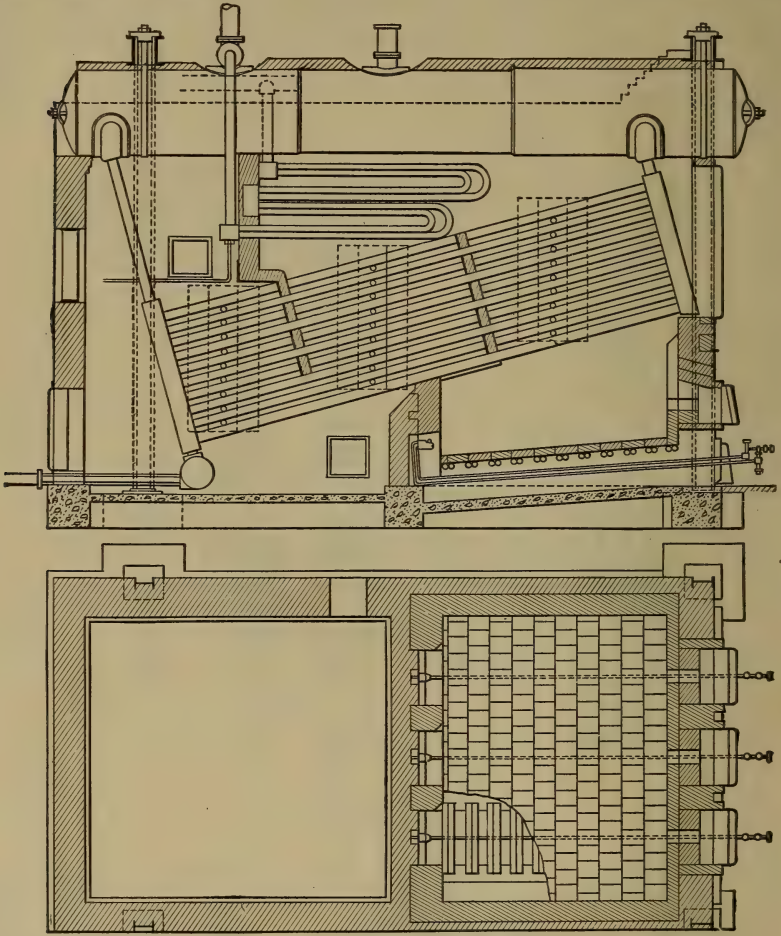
Furnace for Burning Fuel Oil, Rear Feed (Hammel).
